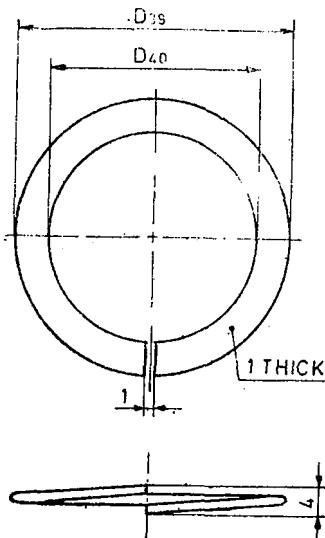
GASKET RING (FOR 24 kV/630, 1 000, 2 000 AND 3 150 A RATING)
